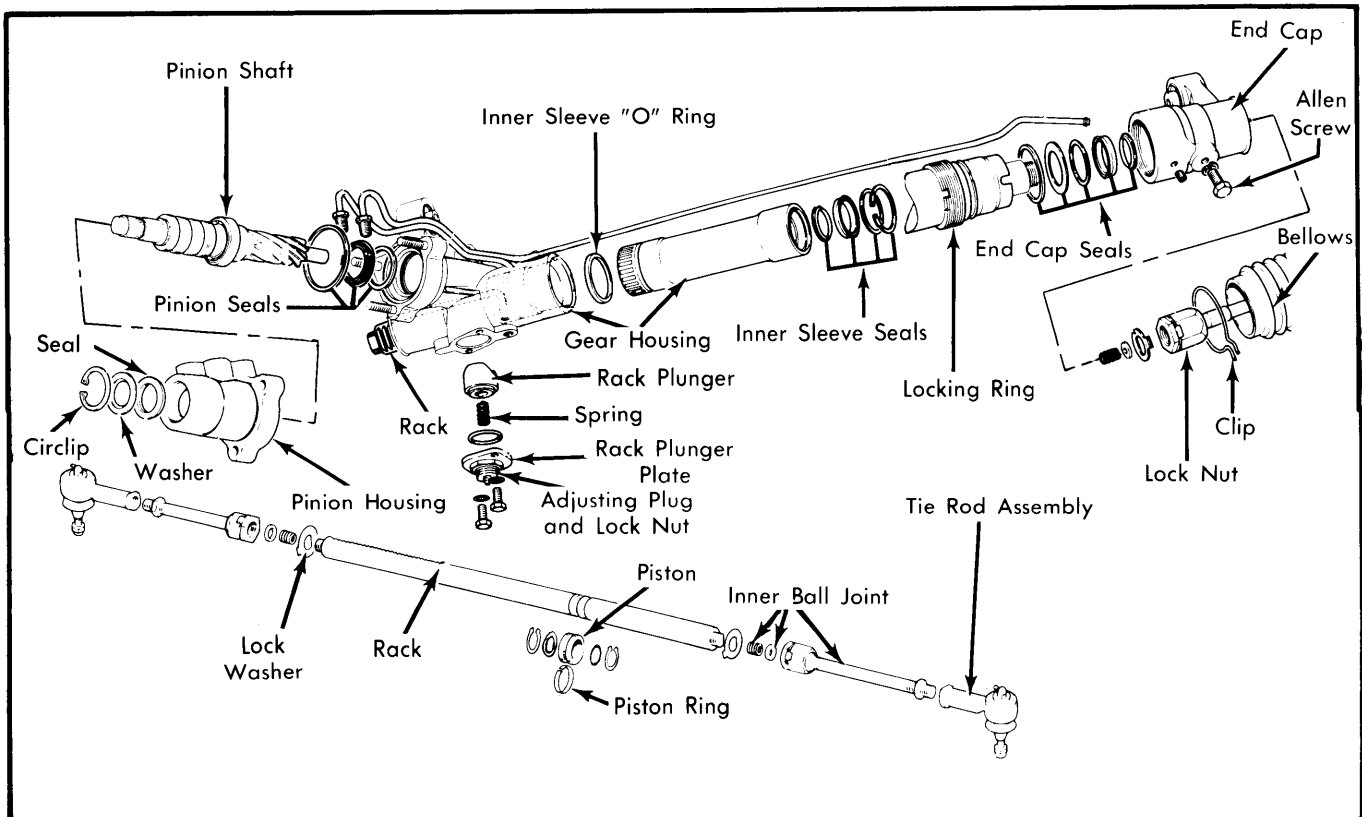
Exploded View of Jaguar and Triumph Power Assisted Rack and Pinion Steering Gear
